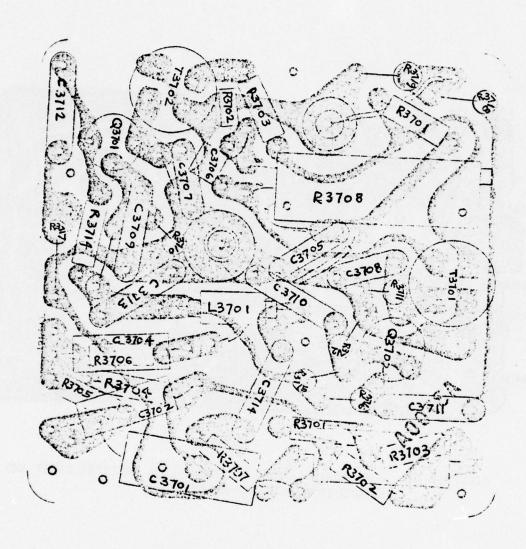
P.C. BOARD LAYOUT FOR THE A3700A CRS PHASE DISCRIMINATOR ASSEMBLY
